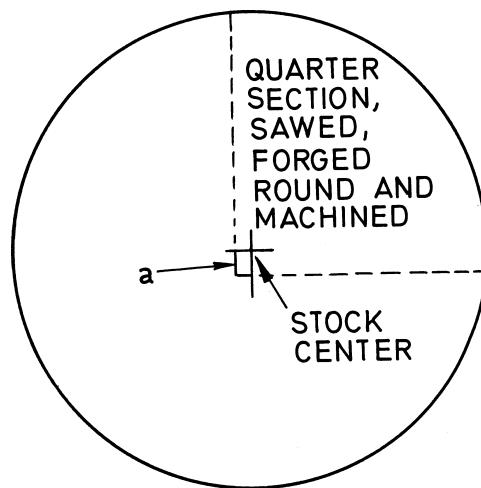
QUARTER SECTION SPECIMEN FROM ROUND SECTION FOR MAGNETIC PARTICLE TEST, FORGING AND MACHINING
